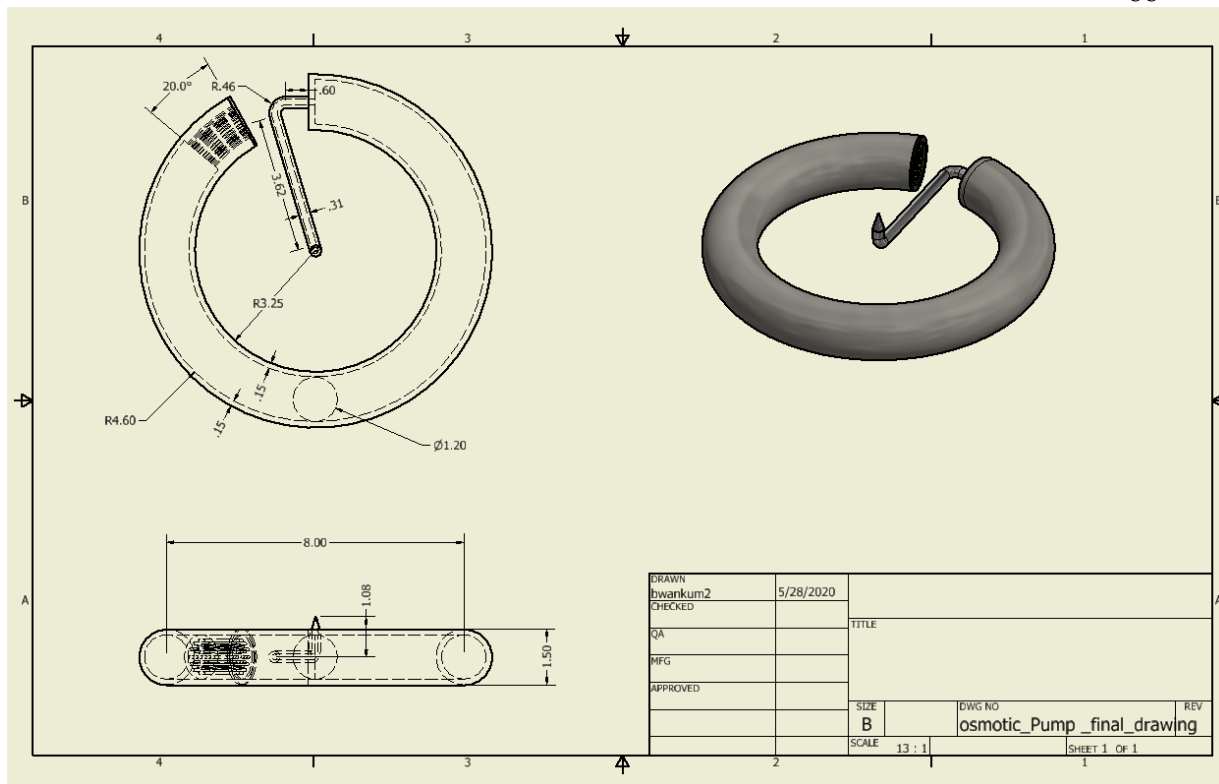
Drawing of the osmotic pump. Units are in millimeters.
